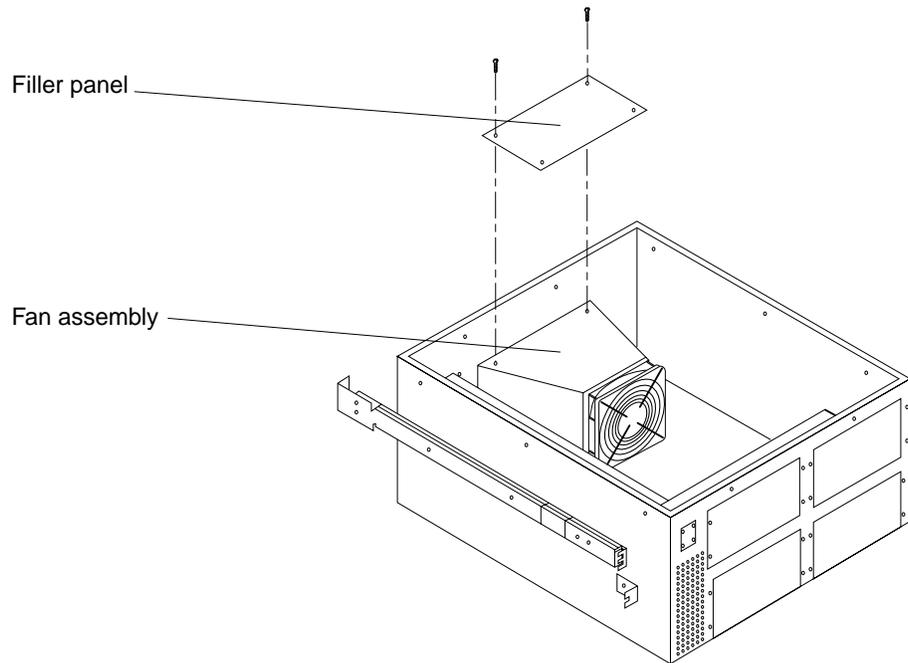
Location of the Fan Assembly in the Multi-Tape Backup Tray
